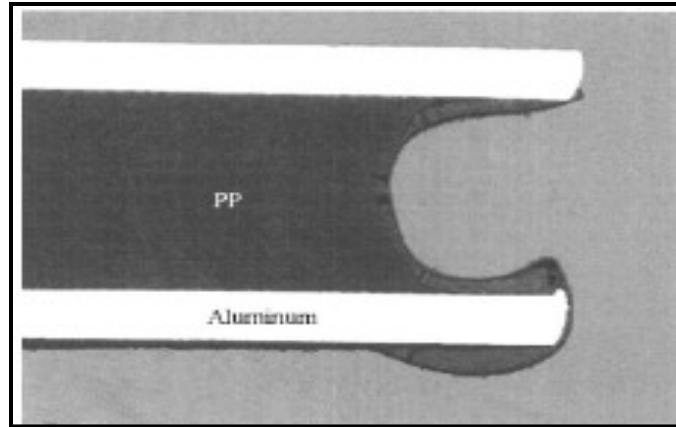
Laser machined laminated stack of an aluminum composite. Damage to the interlaminar layer is clearly visible [25].
